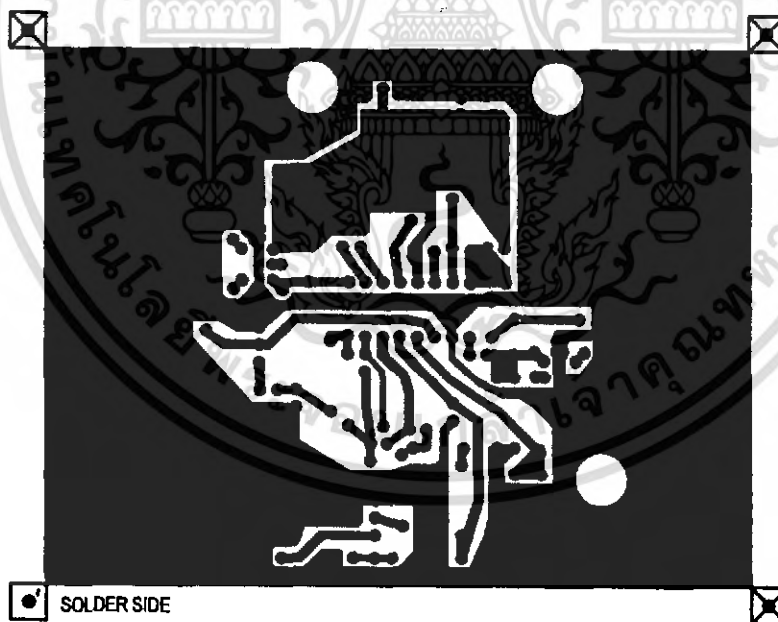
MC3371 PC Board Circuit or Solder Side as Viewed through Component Side
